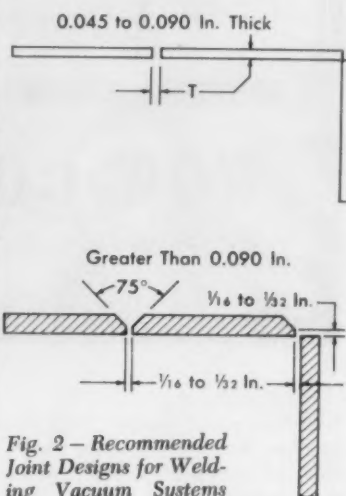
Recommended Joint Designs for Welding Vacuum Systems
